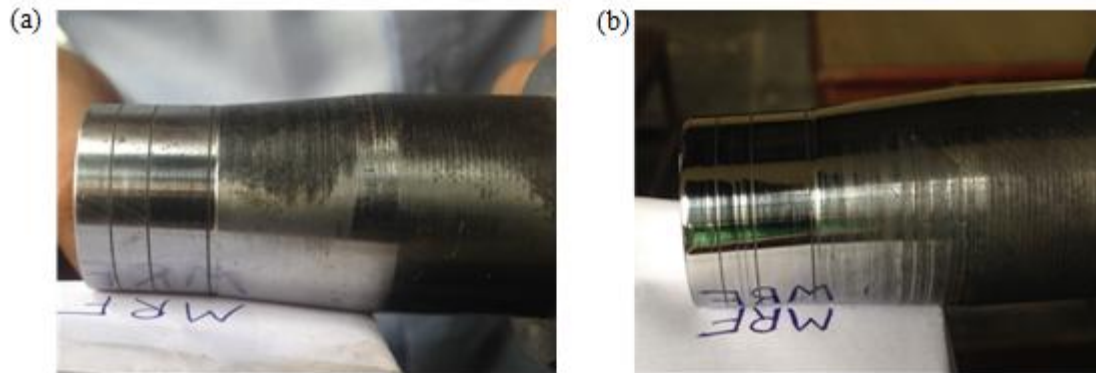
Mirror image of cylindrical surface of permanent mould punch (a) before and (b) after 120 minutes of finishing
